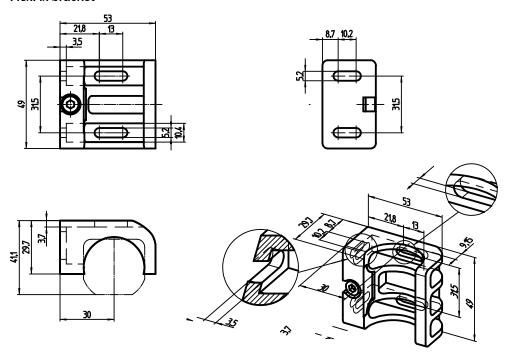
Dimensional drawing of the FlexFix bracket (2066614)
